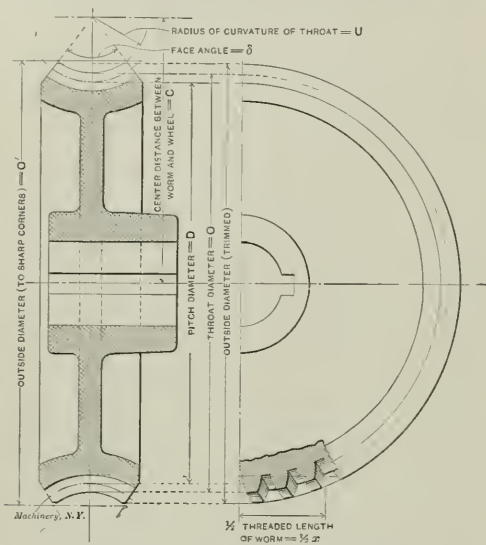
Nomenclature of Worm-wheel Dimensions.
